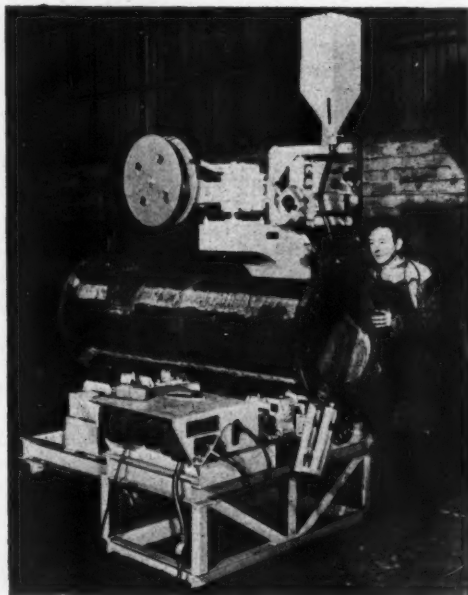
Typical application of a snap-switch to in-process gauging equipment on a cylindrical grinding machine
